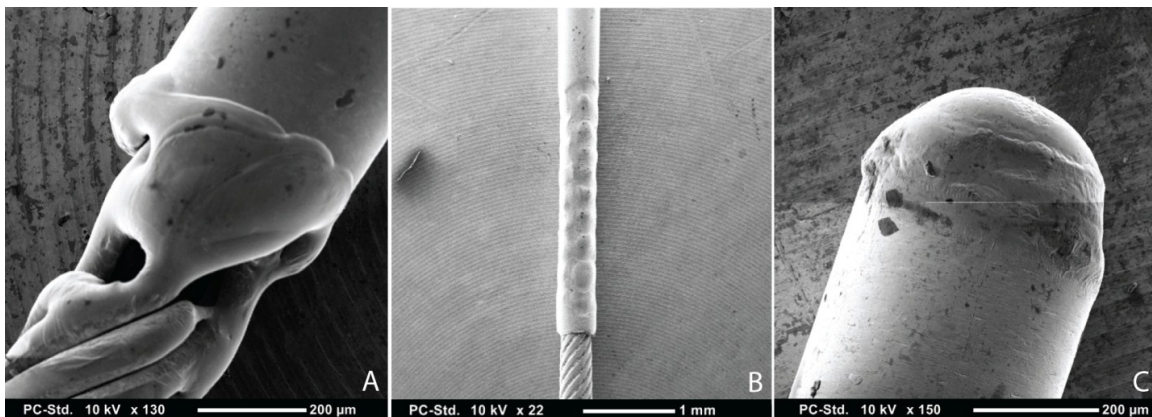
Laser welding of nitinol tube and actone flat braided wire at the edge of the tube (center edge weld) (A), on the tube only without contacting the actone flat (center tube weld) (B) and at the end of the flush nitinol tube-actone flat interface (end weld) (C).
